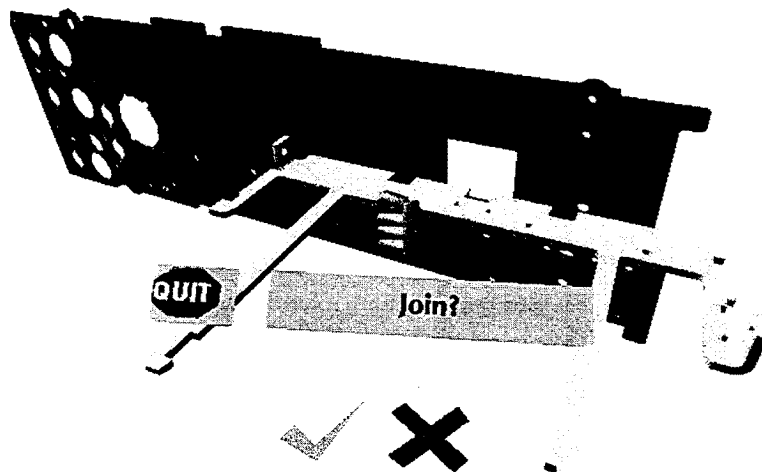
Two sheet metal components, a hand and a toolbox in a virtual environment
